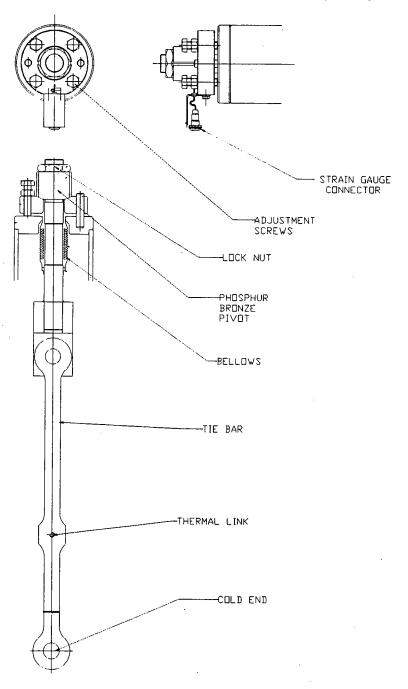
VERTICAL SUPPORT ROD ASSEMBLY Q2/3
